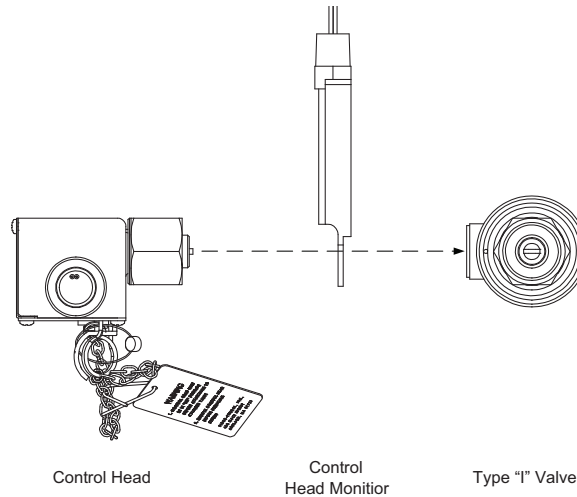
Control Head and Placements Supervision Component Installation to Type "I" Valve, Top View
